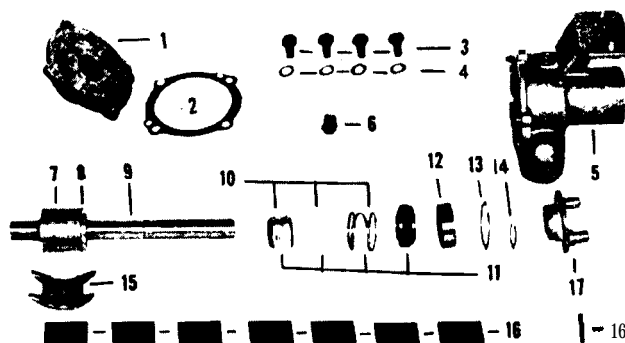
Water Pump—Standard Single Neoprene Impeller Type (Sherwood)
